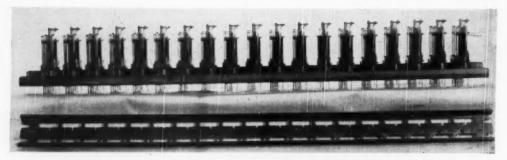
CHANNEL-TYPE MOUNTING PLATE ARRANGED FOR MOUNTING A SINGLE ROW OF APPARATUS
